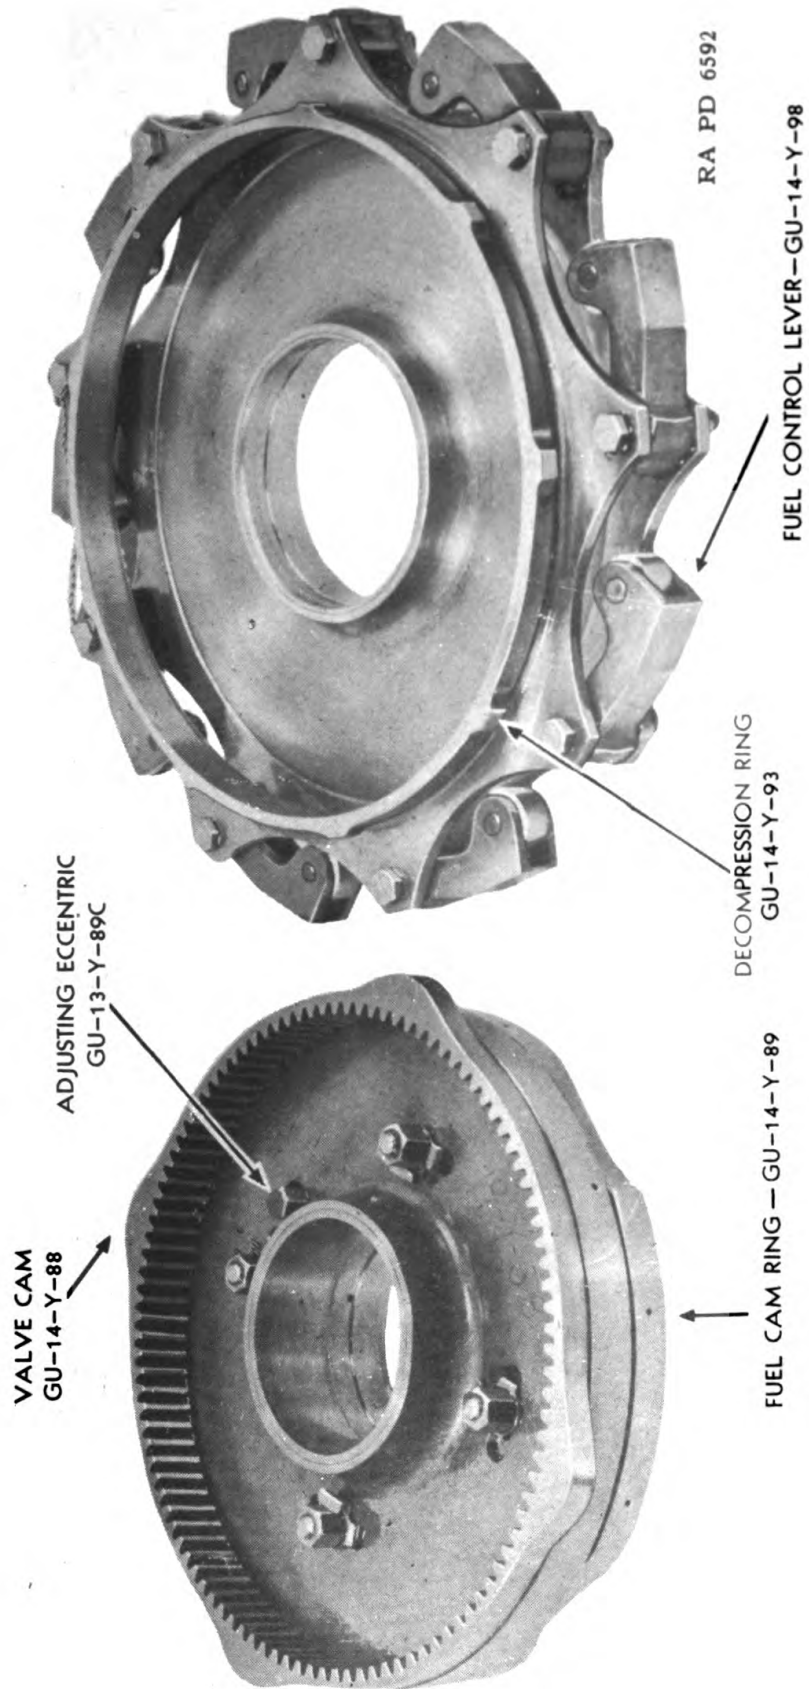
The valve cam, decompression and fuel control assemblies.
